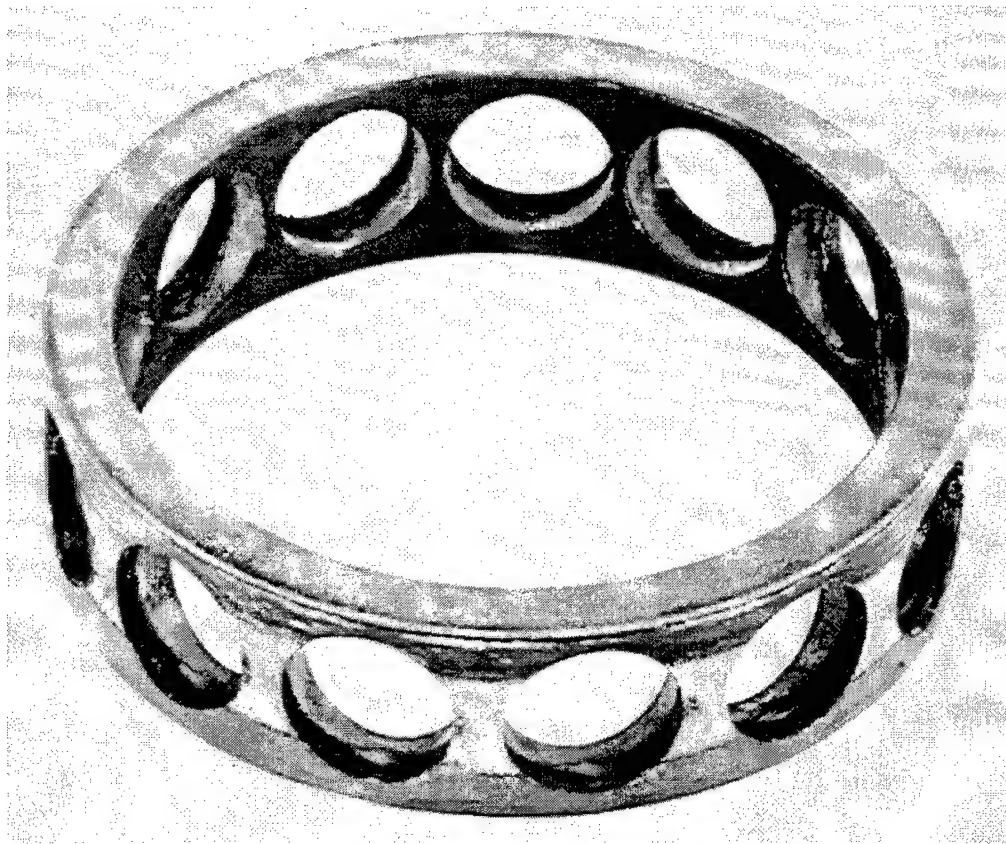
AISI 4340 caged used in the vapor delivery test. The silver is removed from the land surfaces. The silver plating on the noncontacting surfaces is heavily oxidized.
